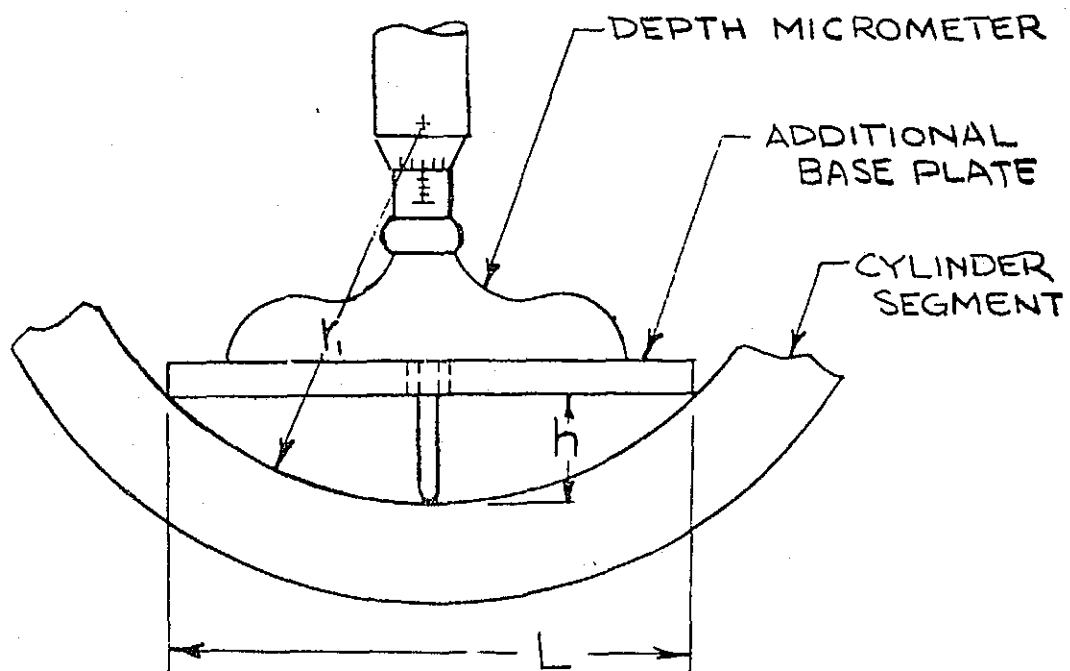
Method used for determining inside radius dimension of tubular segment.
